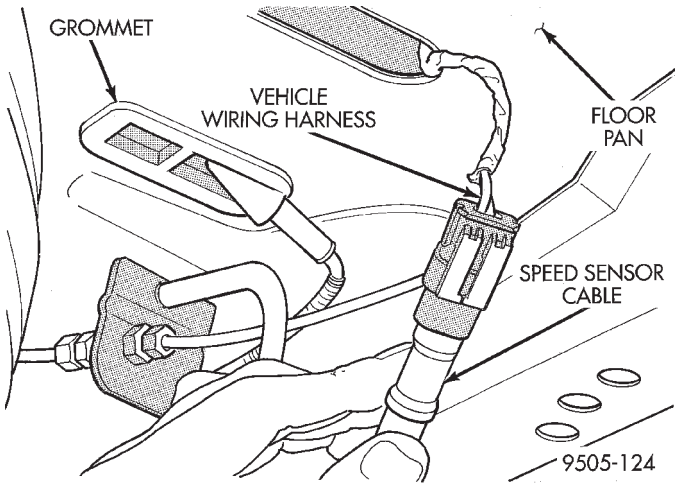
Rear Speed Sensor Cable Connection To Vehicle Wiring Harness
